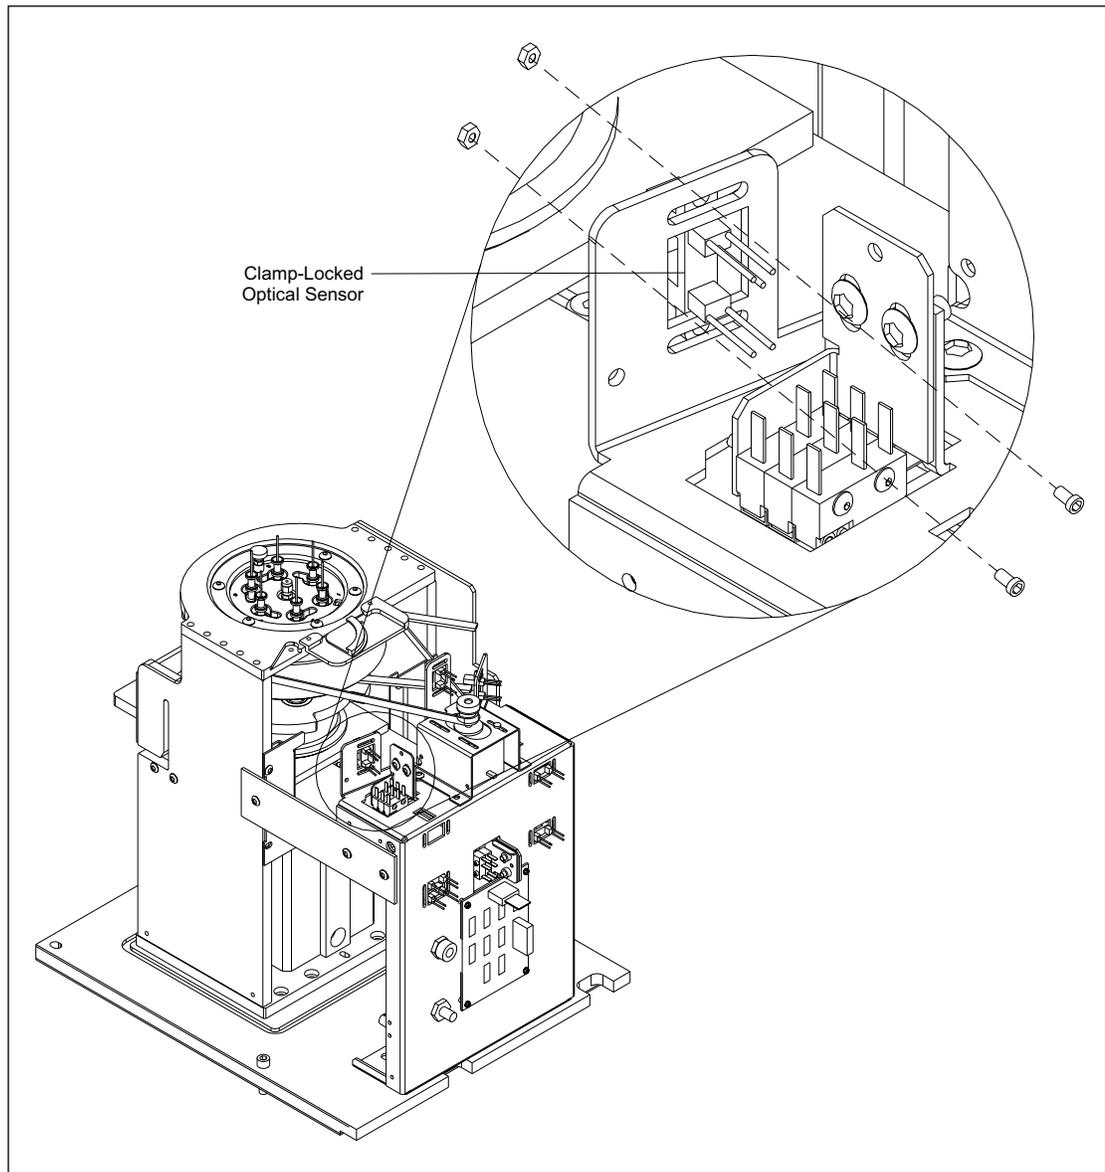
Anode Cover Clamp-Locked Optical Sensor Mounting.
